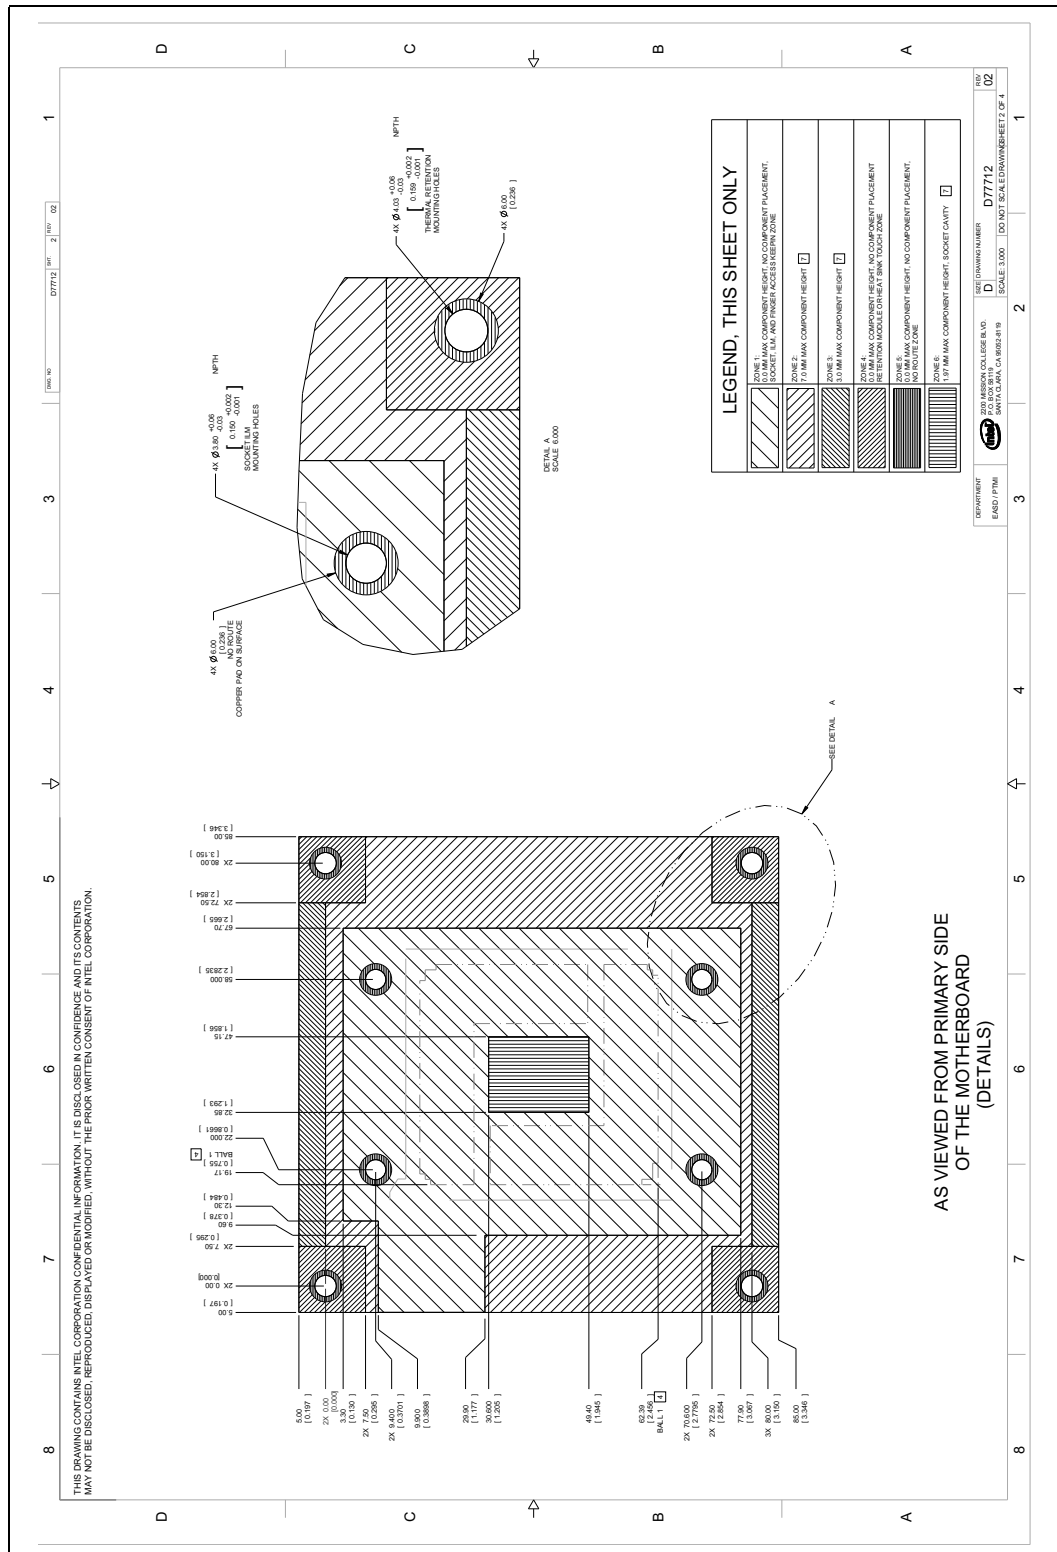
Bottom Side Baseboard Keep-Out Zones
